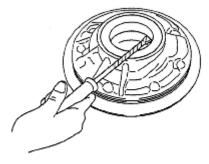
Identifying Seal Rings Of Oil Pump Courtesy of MAZDA MOTORS CORP.
